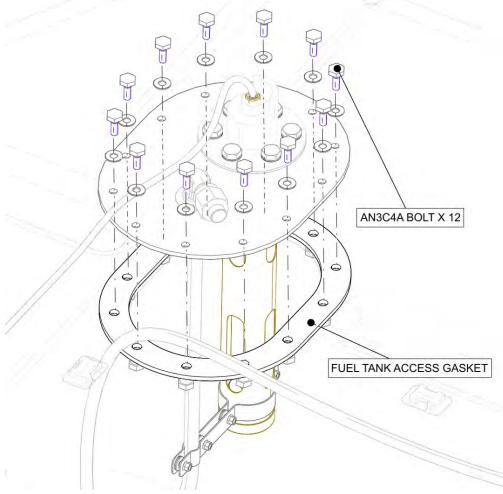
REMOVE FUEL TANK ACCESS PLATE
